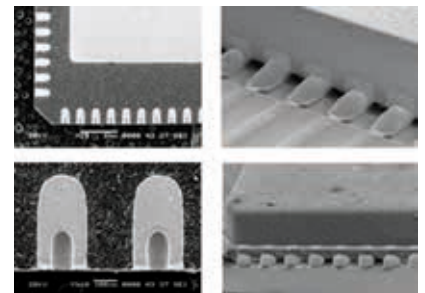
The side wettable lead with concavity (left) creates solder fillets of known volume that enables visual inspection of package to PCB joints. The top right view shows a saw singulated package with a 1.0mm lead pitch and the bottom right view shows a punch singulated package with a 0.5mm lead pitch.
